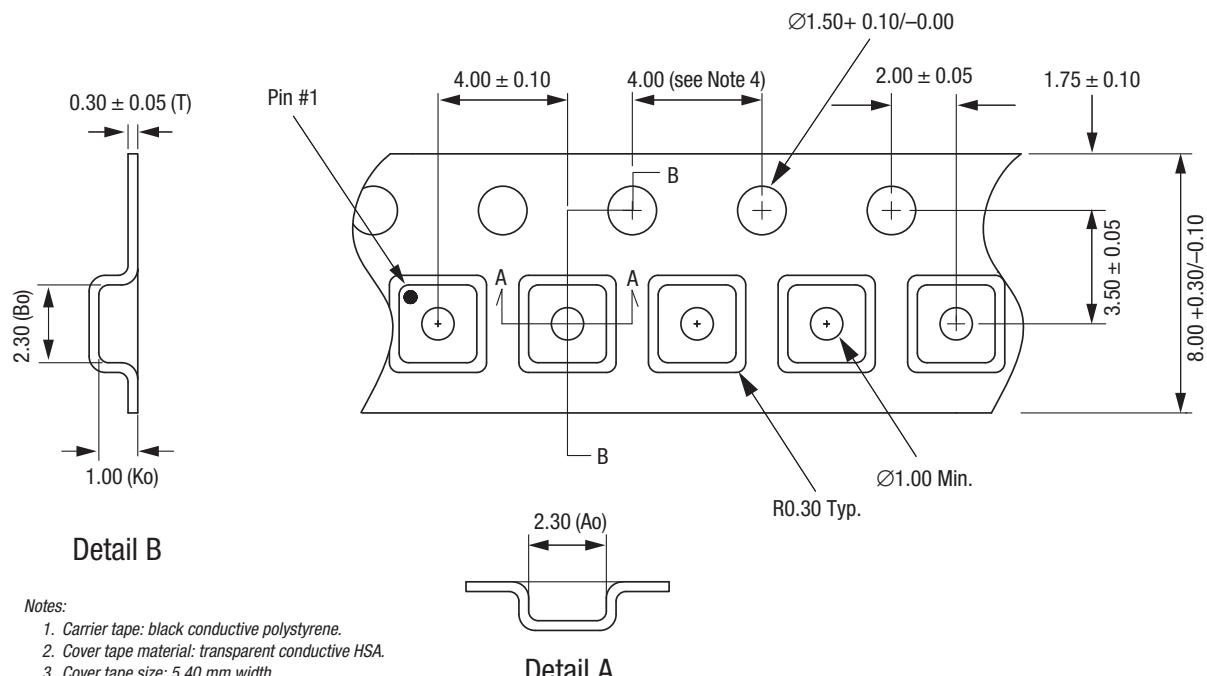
SKY65094-360LF Tape and Reel Dimensions
